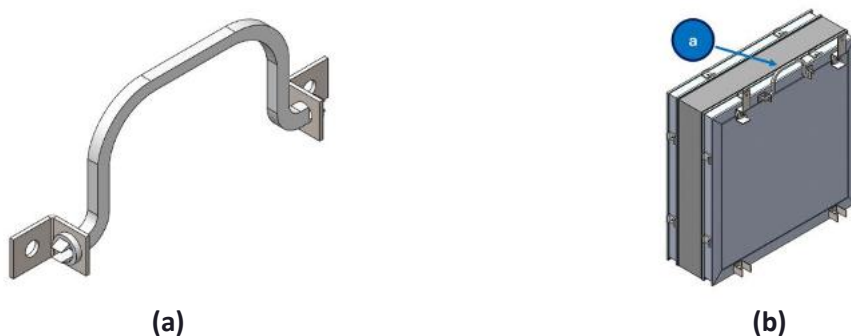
The handle of the prefabricated component. (a) Handle assembly, and (b) handle as part of the general component.
